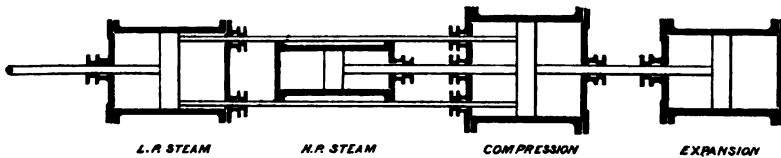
COMPOUND STEAM ENGINE, WITH COMPRESSION AND EXPANSION AIR CYLINDERS, FORMING ONE SIDE OF REFRIGERATING MACHINE FOR SHIPBOARD SERVICE.
